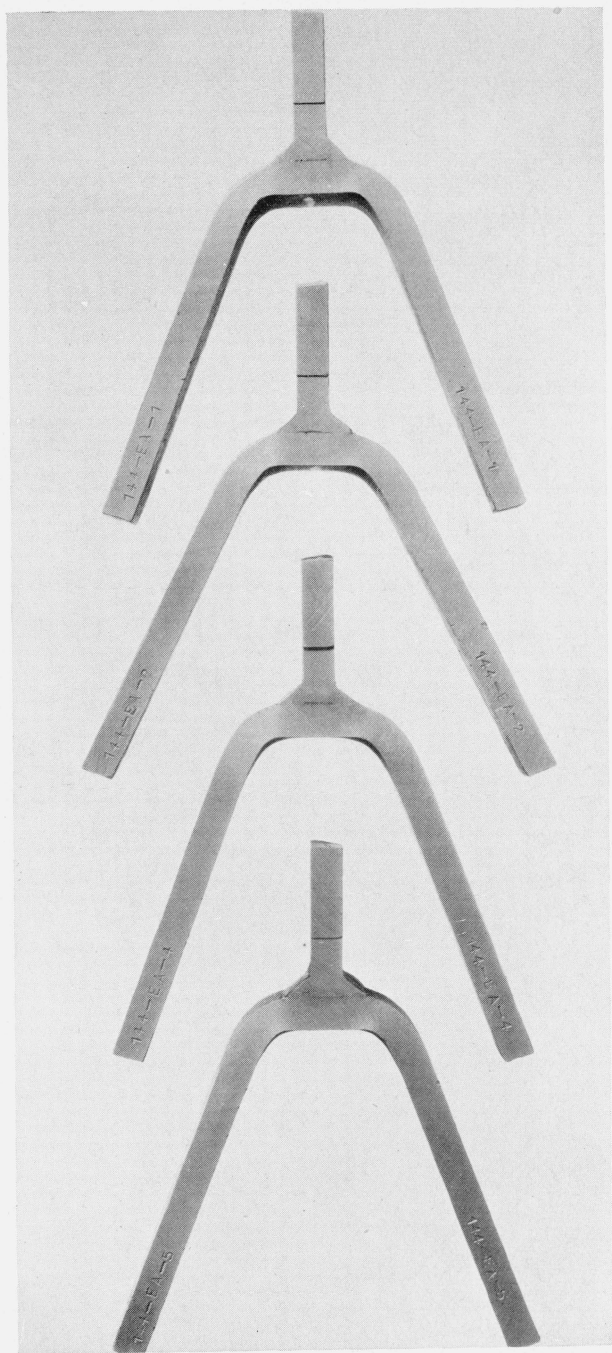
Steel 144, $\frac{1}{2}$ -in. plates, welded after normalizing treatment
